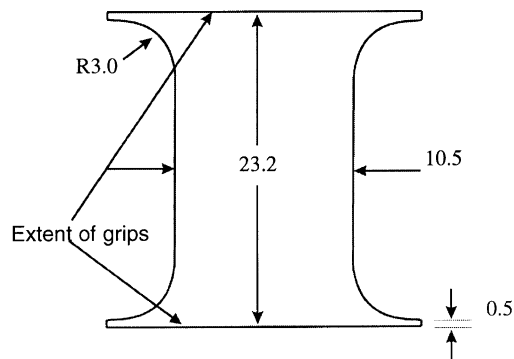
Tensile specimen geometry. Dimensions in mm.
